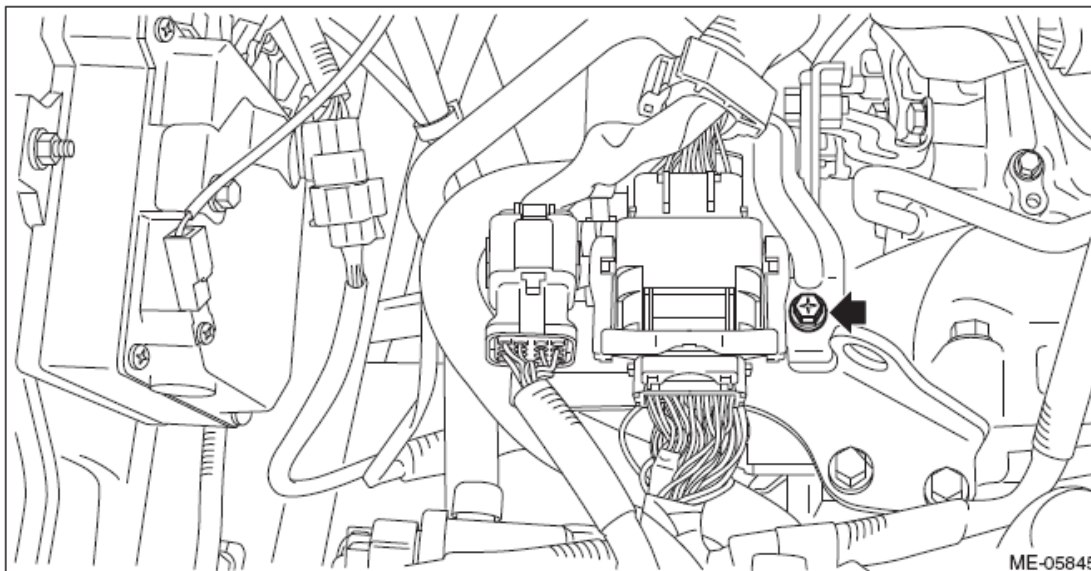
Locating Bulkhead Harness Connector Bracket Bolt
